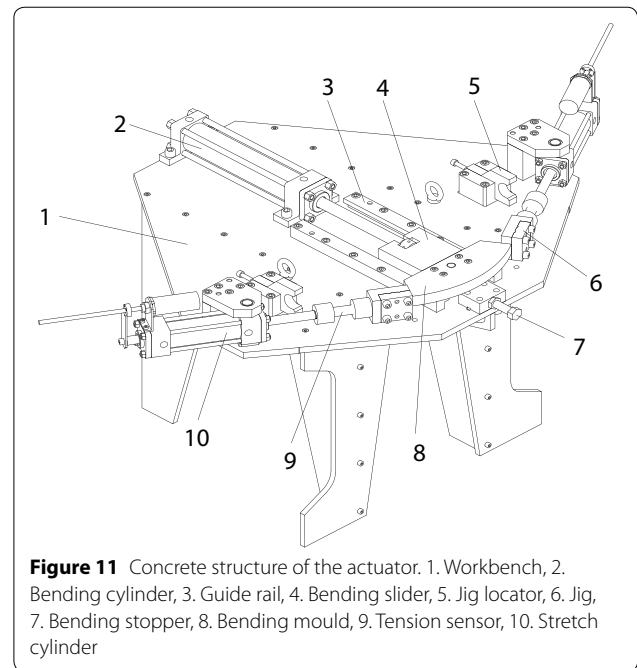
Concrete structure of the actuator. 1. Workbench, 2. Bending cylinder, 3. Guide rail, 4. Bending slider, 5. Jig locator, 6. Jig, 7. Bending stopper, 8. Bending mould, 9. Tension sensor, 10. Stretch cylinder
